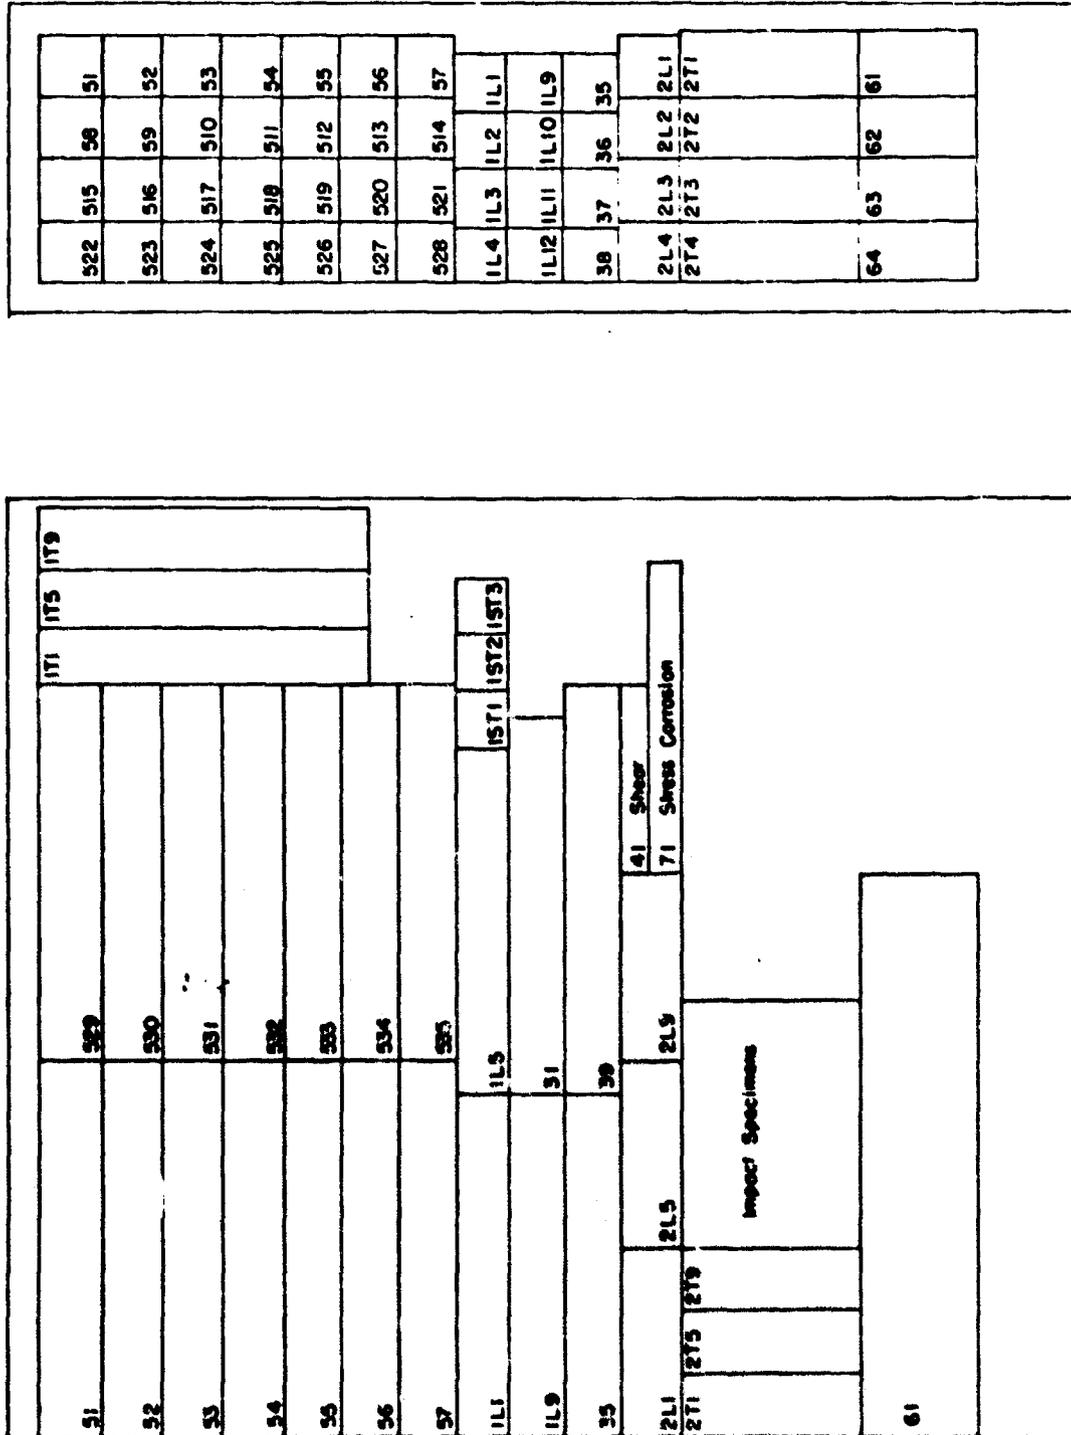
SPECIMEN LAYOUT FOR 70-49 FORGING
